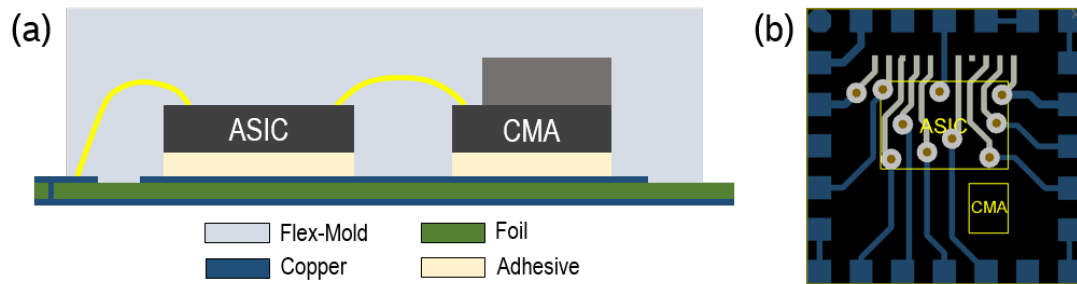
(a) Schematic of FlexLGA assembly (b) FlexLGA board circuit layout
